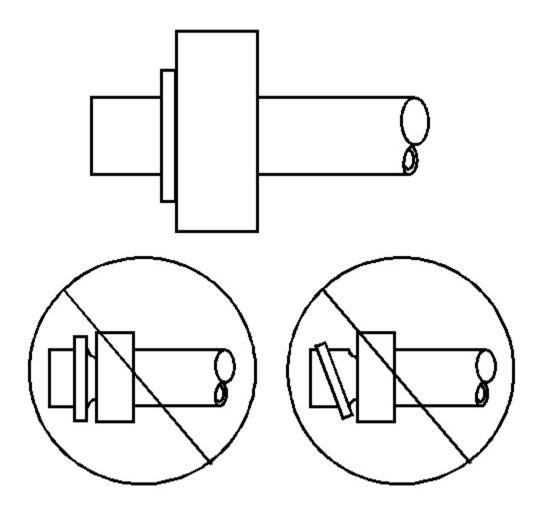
Identifying Sealing Washer Courtesy of GENERAL MOTORS CORP.
